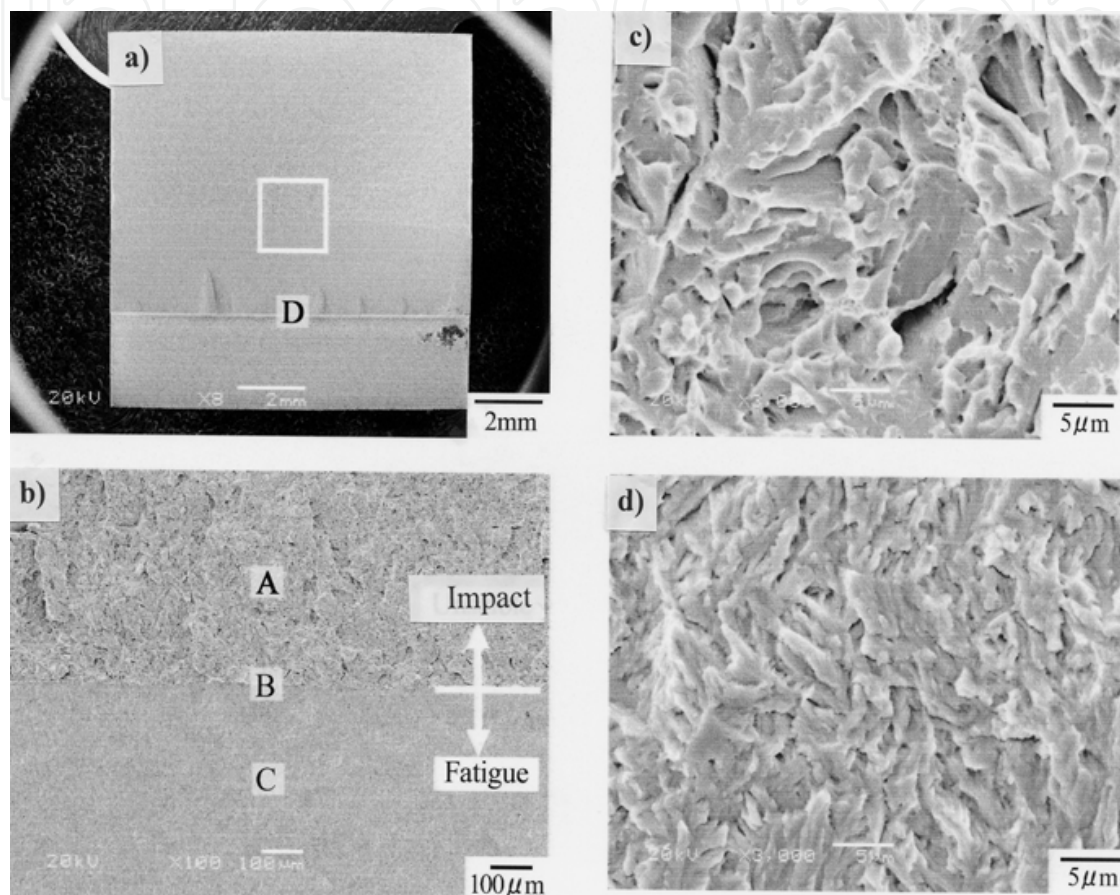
Impact fracture surface. SKD61, HRC 52, 2.5mm saw cut with fatigue crack[3]. a) Macroscopic fracture surface, b) Enlargement of the window area in a), c) Impact fracture surface (A in c)), Fatigue fracture surface(C in c))
